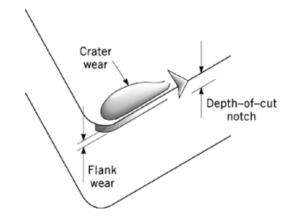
Schematic showing typical wear modes on a cutting tool.
